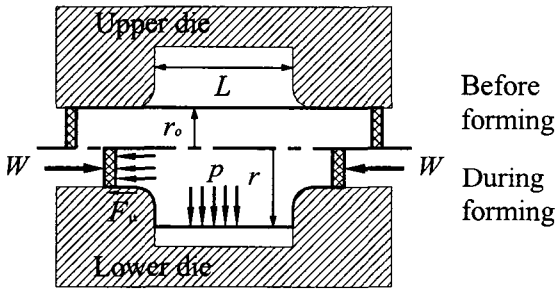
Principle of tube hydroforming (original tube shape and intermediate shape of tube)
